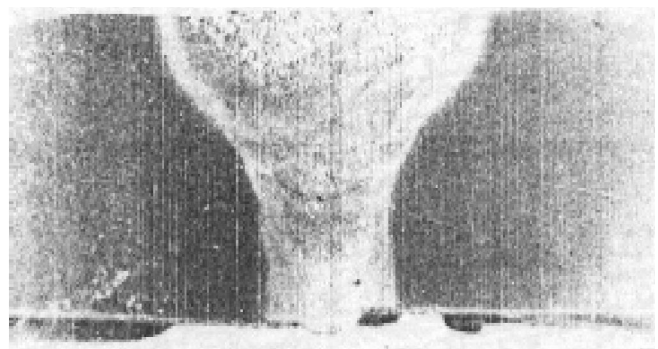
Macrograph of 20mm thick joint welded using MAG welding process and 75°C preheating
